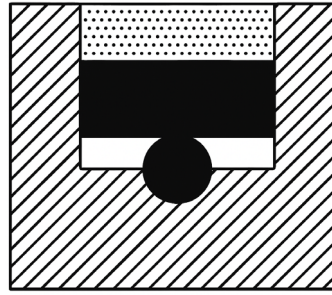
Pressure port feeder hole intersecting Clamp Disk bores.
